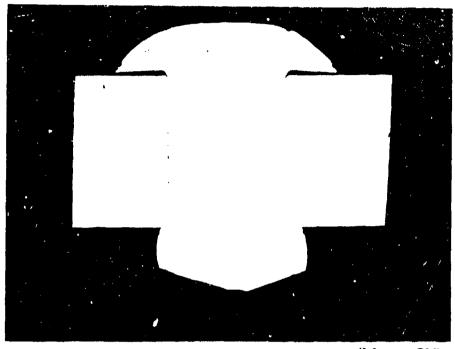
Driving and Hole-Fill Specimens for Pnuematic Hammer Driven Rivets
